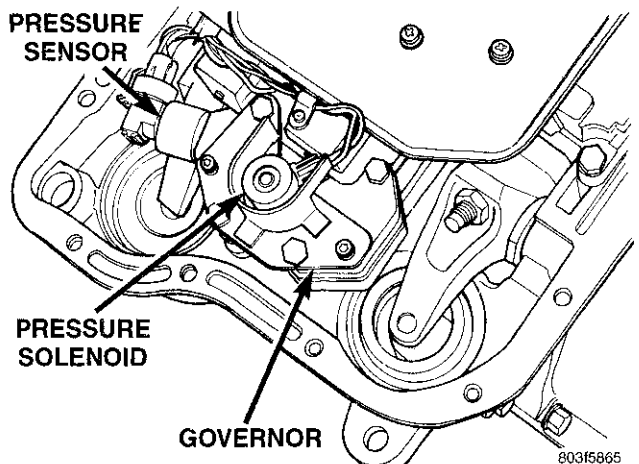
Governor Pressure Solenoid And Sensor Wire Locations
